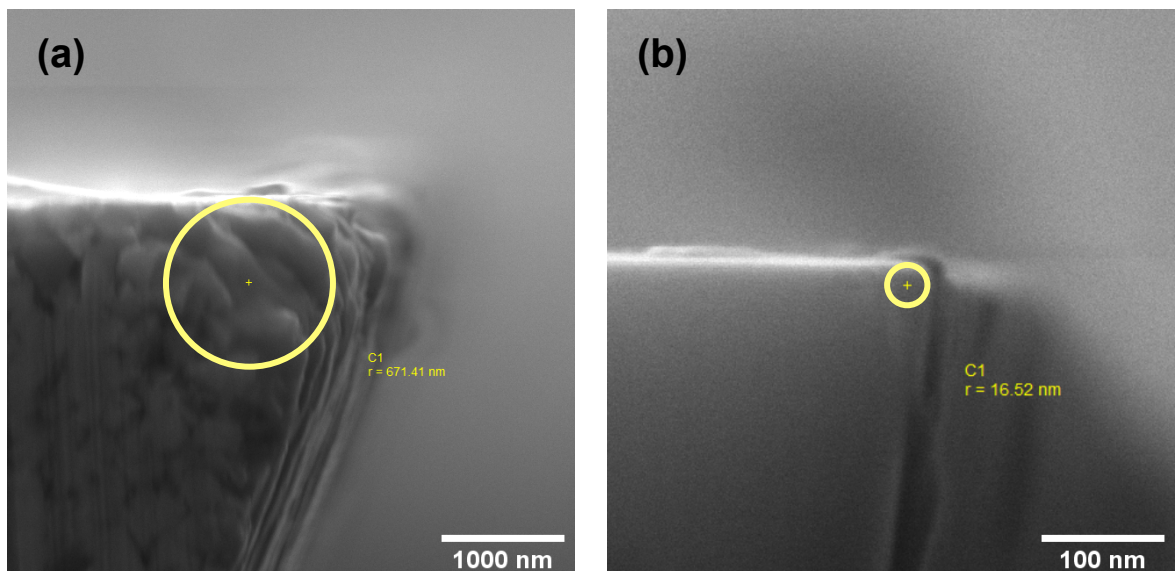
SEM-images of the cutting edge radius, acquired parallel to the tool axis. The yellow circles indicate the measured tool radius. (a) SC-tool, $r = 671$ nm. (b) MD-tool, $r = 17$ nm. The image (b) (MD-tool) has a ten times higher magnification (note the scale bar).
